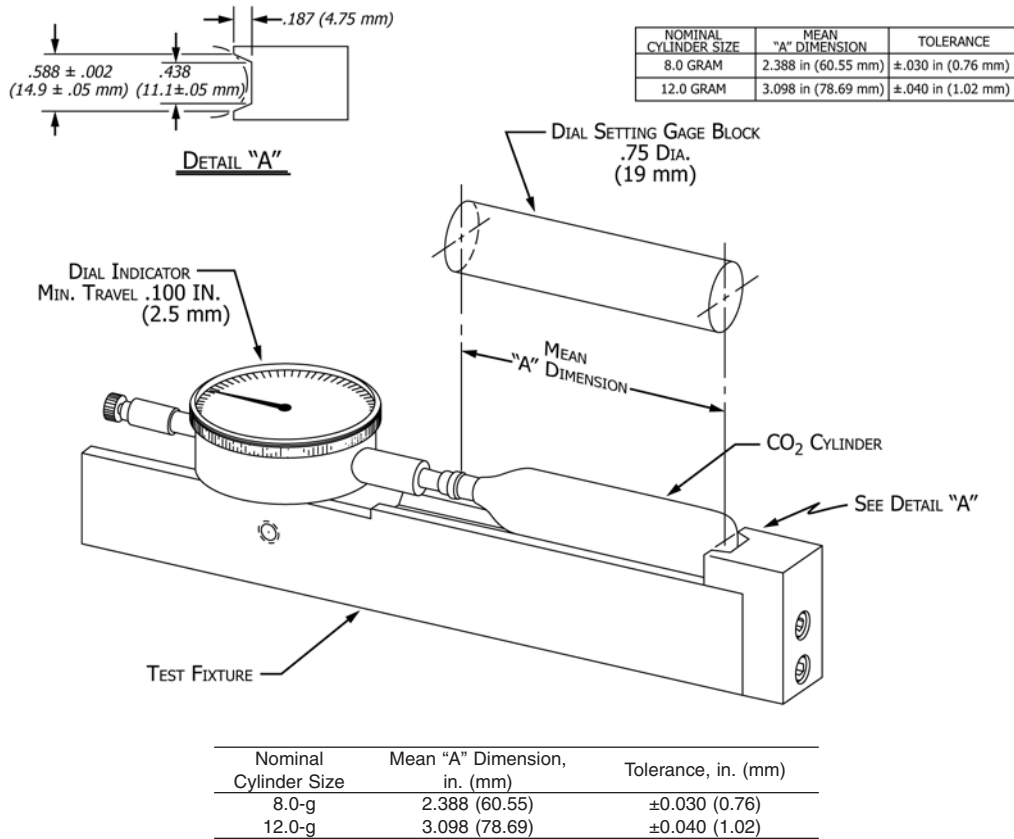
CO₂ Cylinder Non-Refillable Length, Cap to 0.588 Datum Gage
